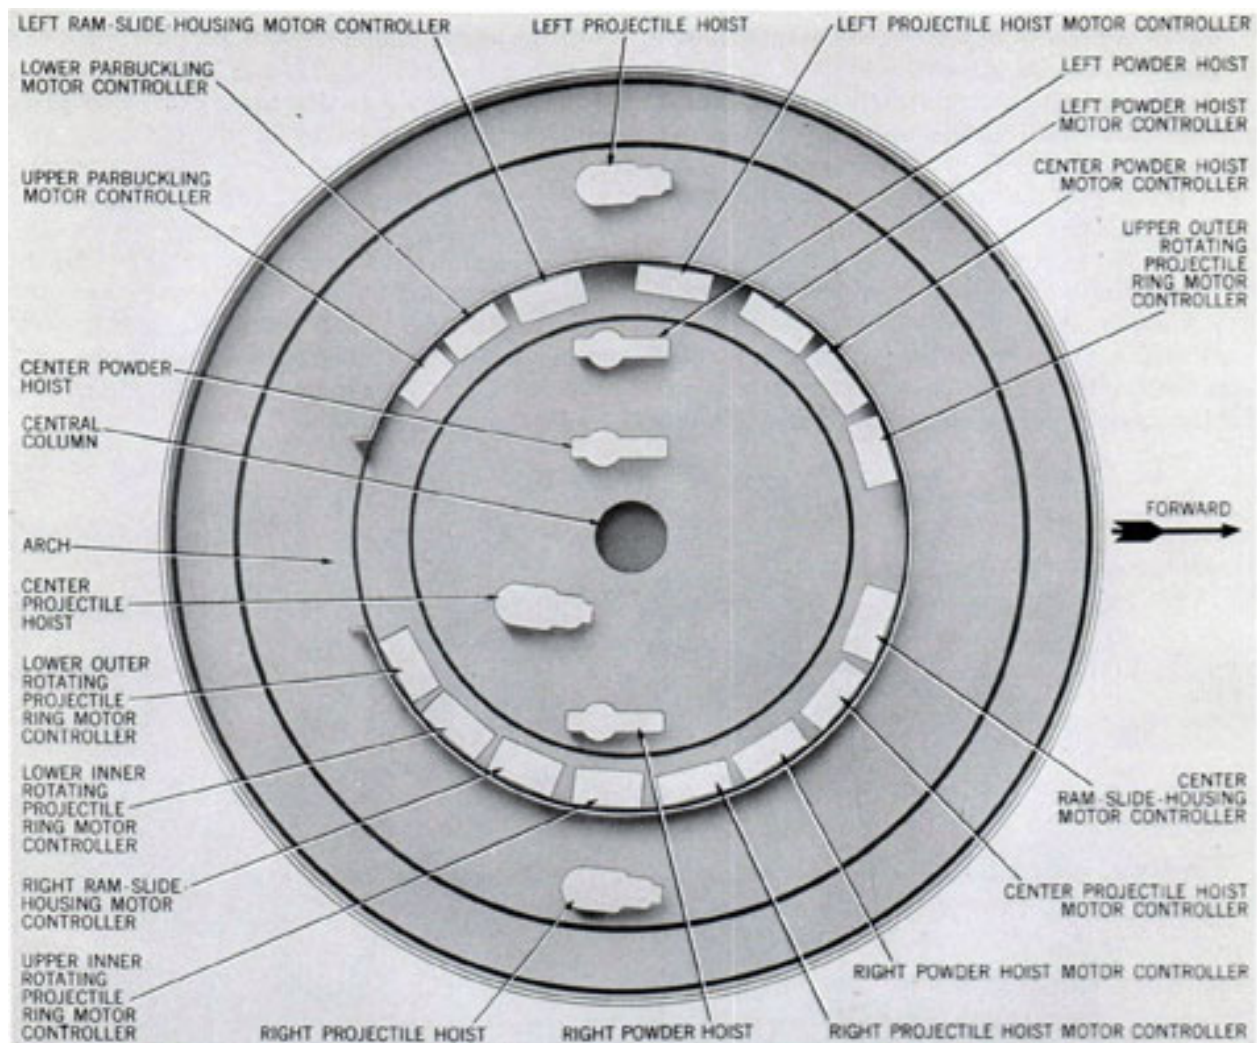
Ordnance Equipment Above Lower Projectile Flat General Arrangement. Plan View
